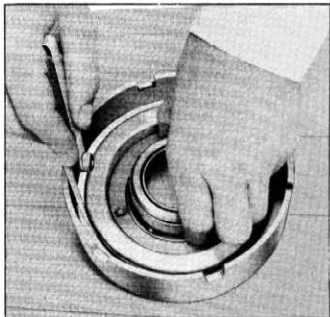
Checking Seating of Clutch Piston Outer Seal
